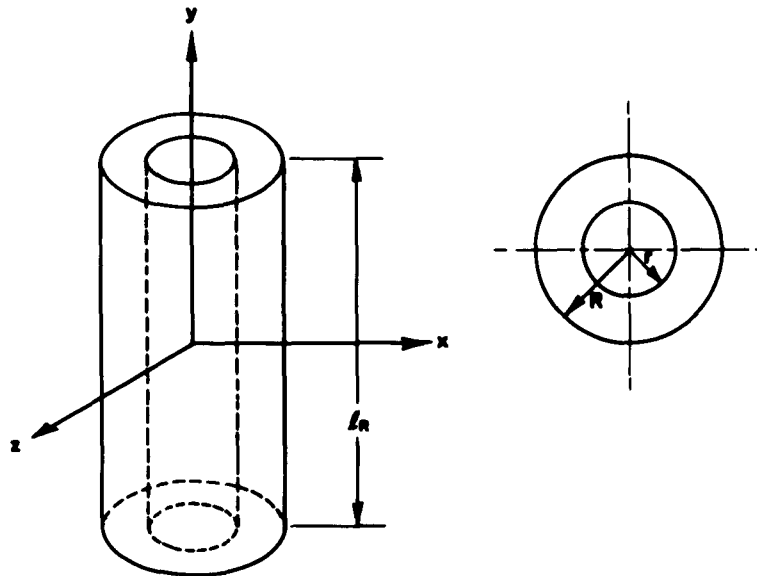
Dimensions of Hollow Cylinder for Equations. (45) and (46).
